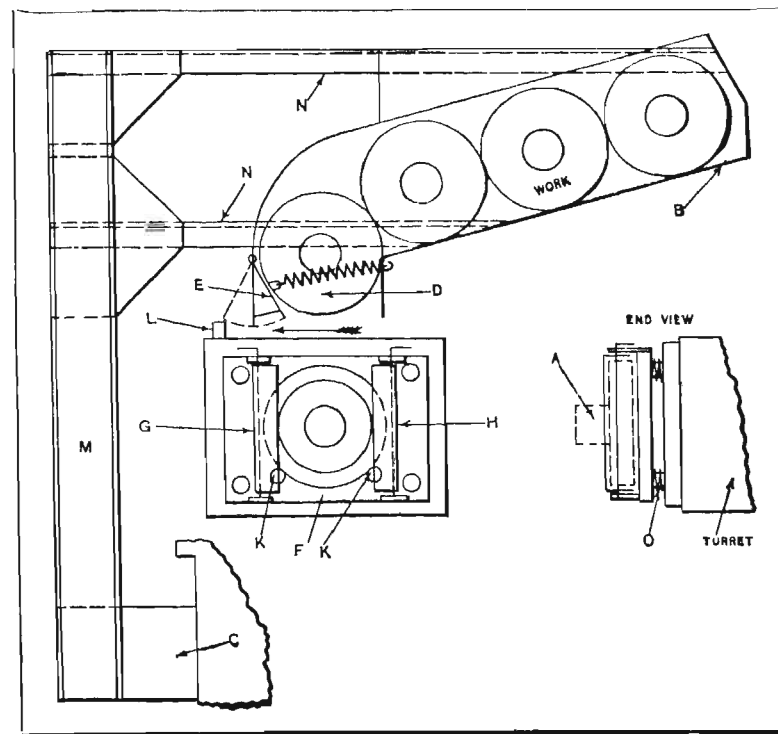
Turret Lathe Magazine for Feeding Casting B, Fig. 1
